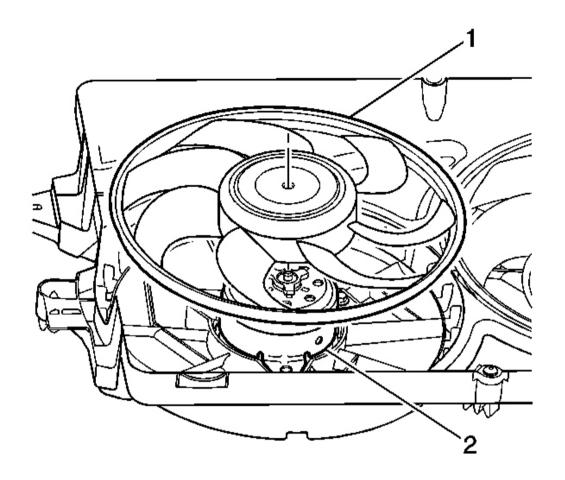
View Of Fan From The Motor Courtesy of GENERAL MOTORS CORP.
